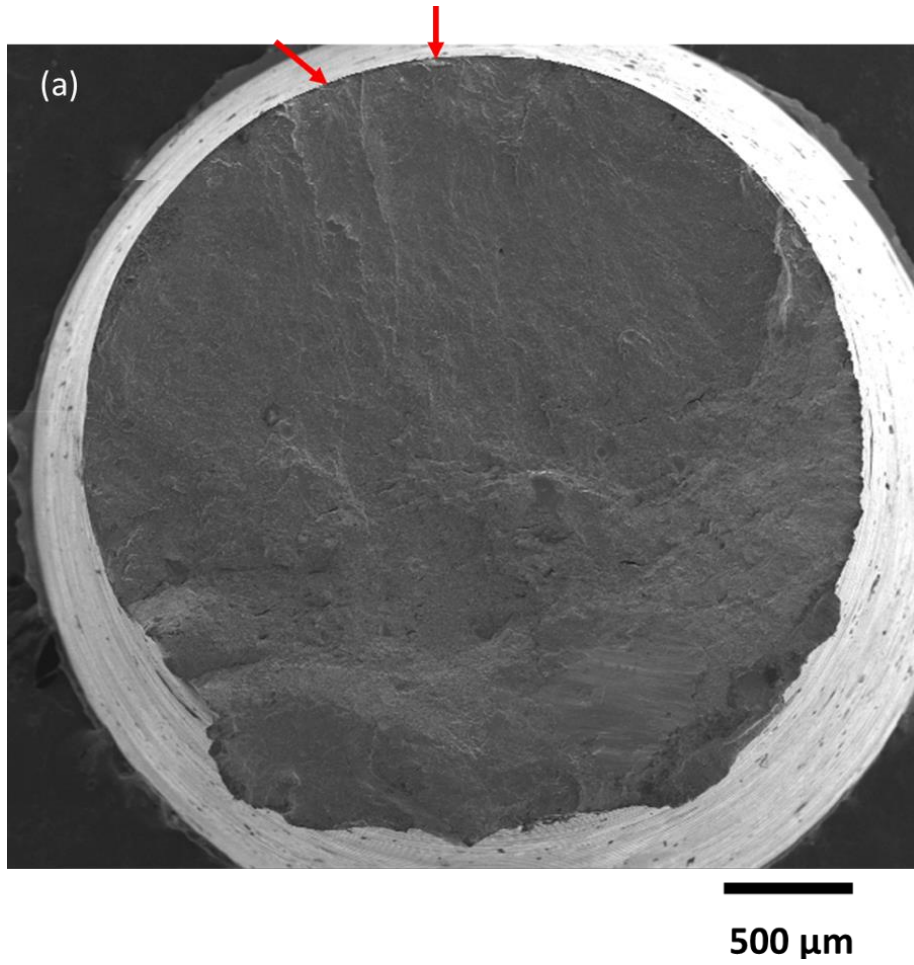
Example of a LOF defect that was exposed to the surface after machining.
